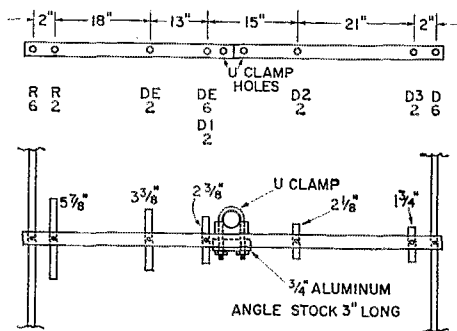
Principal details of the two-band portable array. Positions of the various elements are shown above, with the mounting methods below. Center sections of the 2-meter elements are $\frac{1}{4}$ -inch aluminum rod, tapped for 6-32 thread. The U clamp and angle-stock bracket at the center keep the boom sections in alignment on the vertical support.
